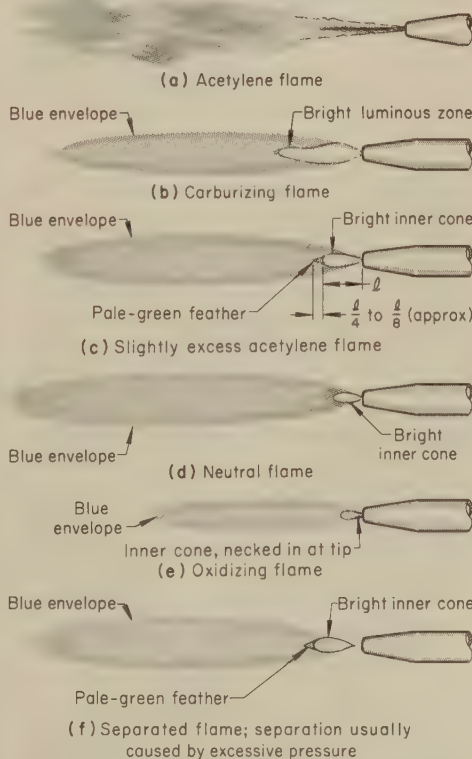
(a) to (e) Conditions visible during adjustment of an oxyacetylene flame; (f) separated flame caused by excessive pressure
